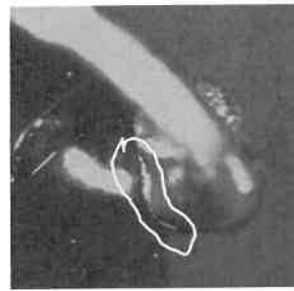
Solder bead on TCO lead from Sub 64 after second Lock-Rotor Test
